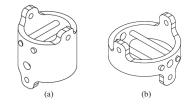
Isometric View of (a) Body segment and (b) Ring connector.
